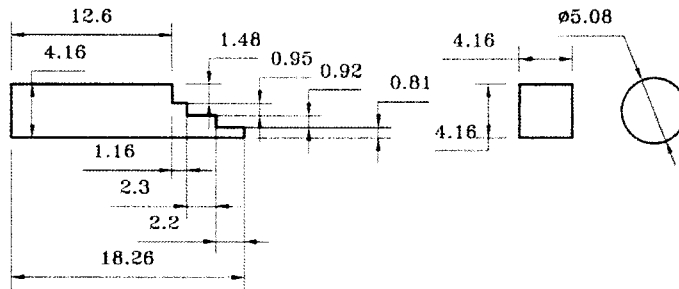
Dimensions of the septum polarizer parts (thickness of stepped septum is 0.6 mm and all dimensions are in millimeter).
